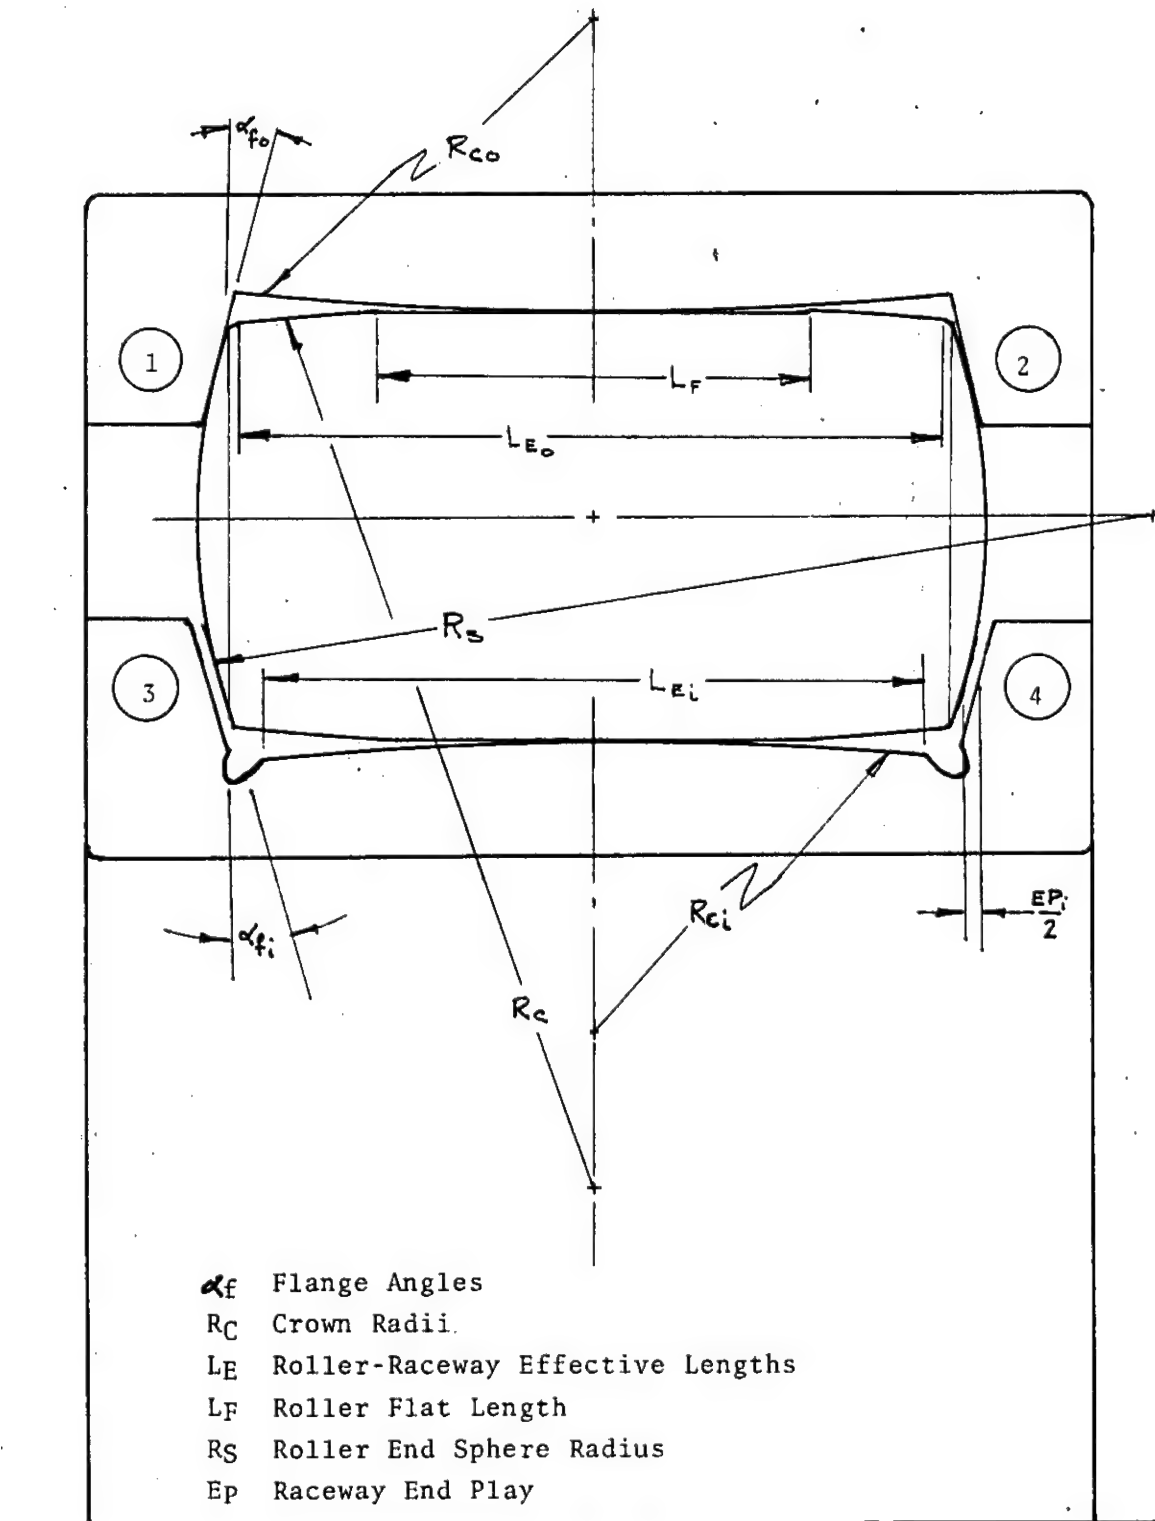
CYLINDRICAL ROLLER BEARING GEOMETRY
